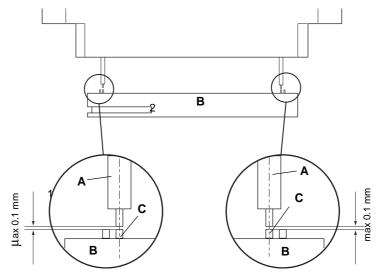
Aligning the Te-MO 96 pipetting head and reference rack
